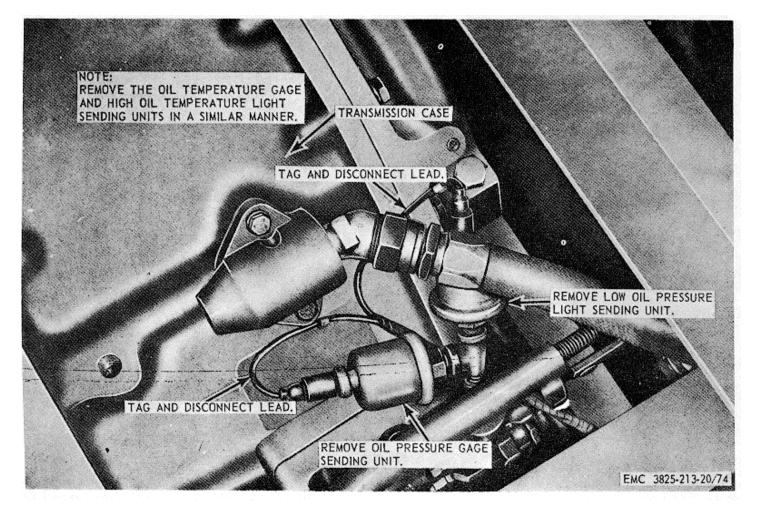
Torque converter and transmission oil temperature and pressure sending units, removal and installation.
